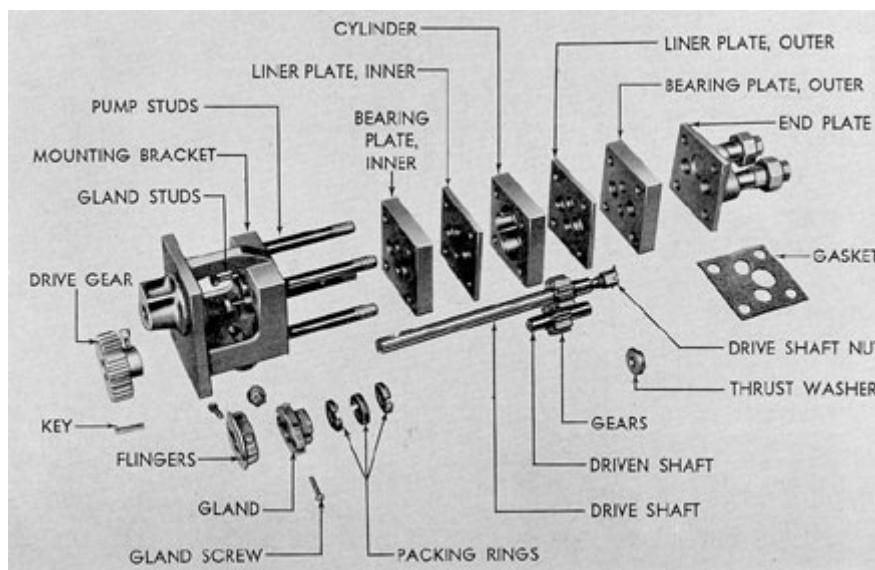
Exploded view of attached fuel all supply pump, F-M.
